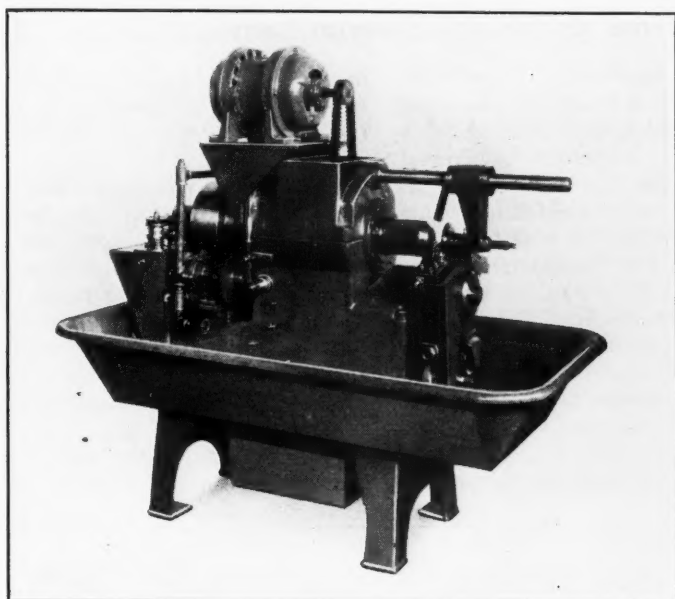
Rickert-Shafer Cutting-off Machine with Tool-holders on Cam-controlled Oscillating Arms
